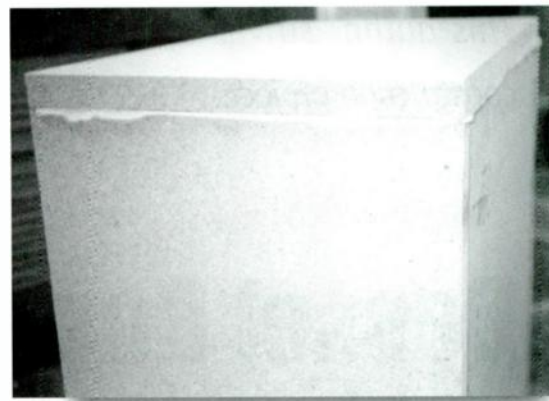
Back of cabinet, butt jointed, with top panel in place. The top panel is cut slightly oversized, then routed flush, before adding the formica.
